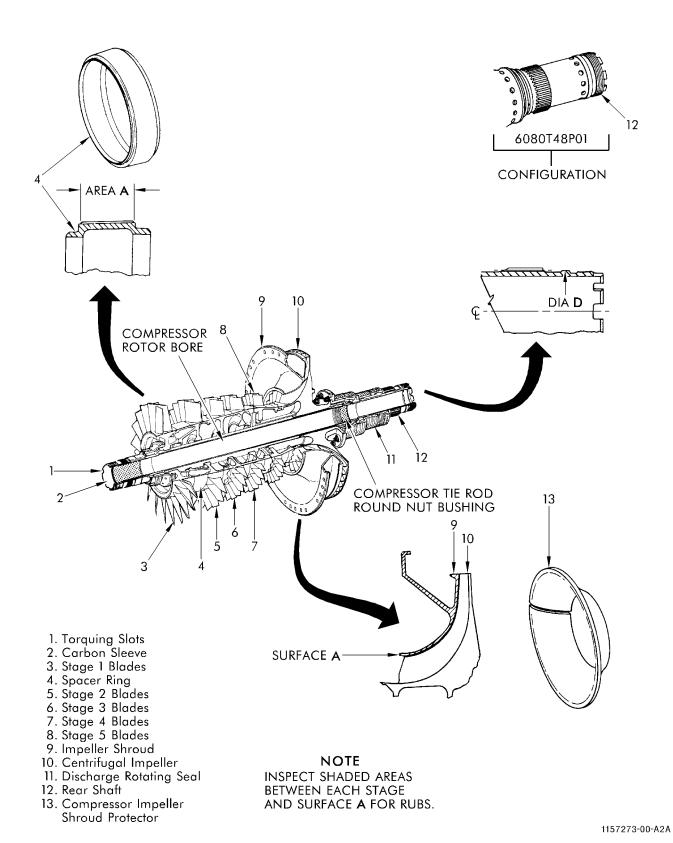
Compressor Rotor Tie Rod Round Nut Bushing and Compressor Bore; Inspection
